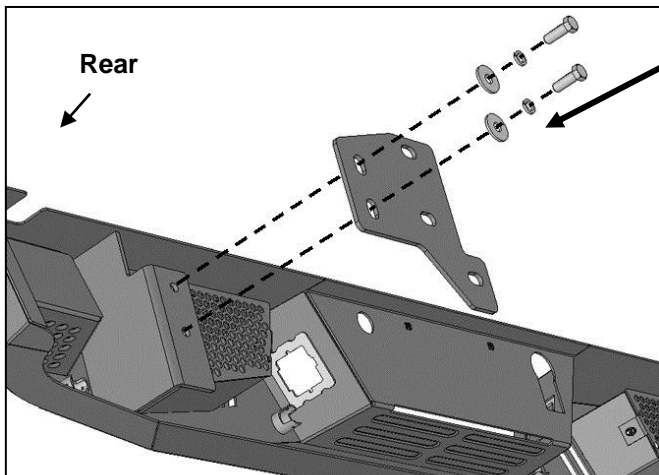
B) Remove the factory hex nuts attaching bumper assembly to frame. STD tow package model pictured (no receiver hitch)
